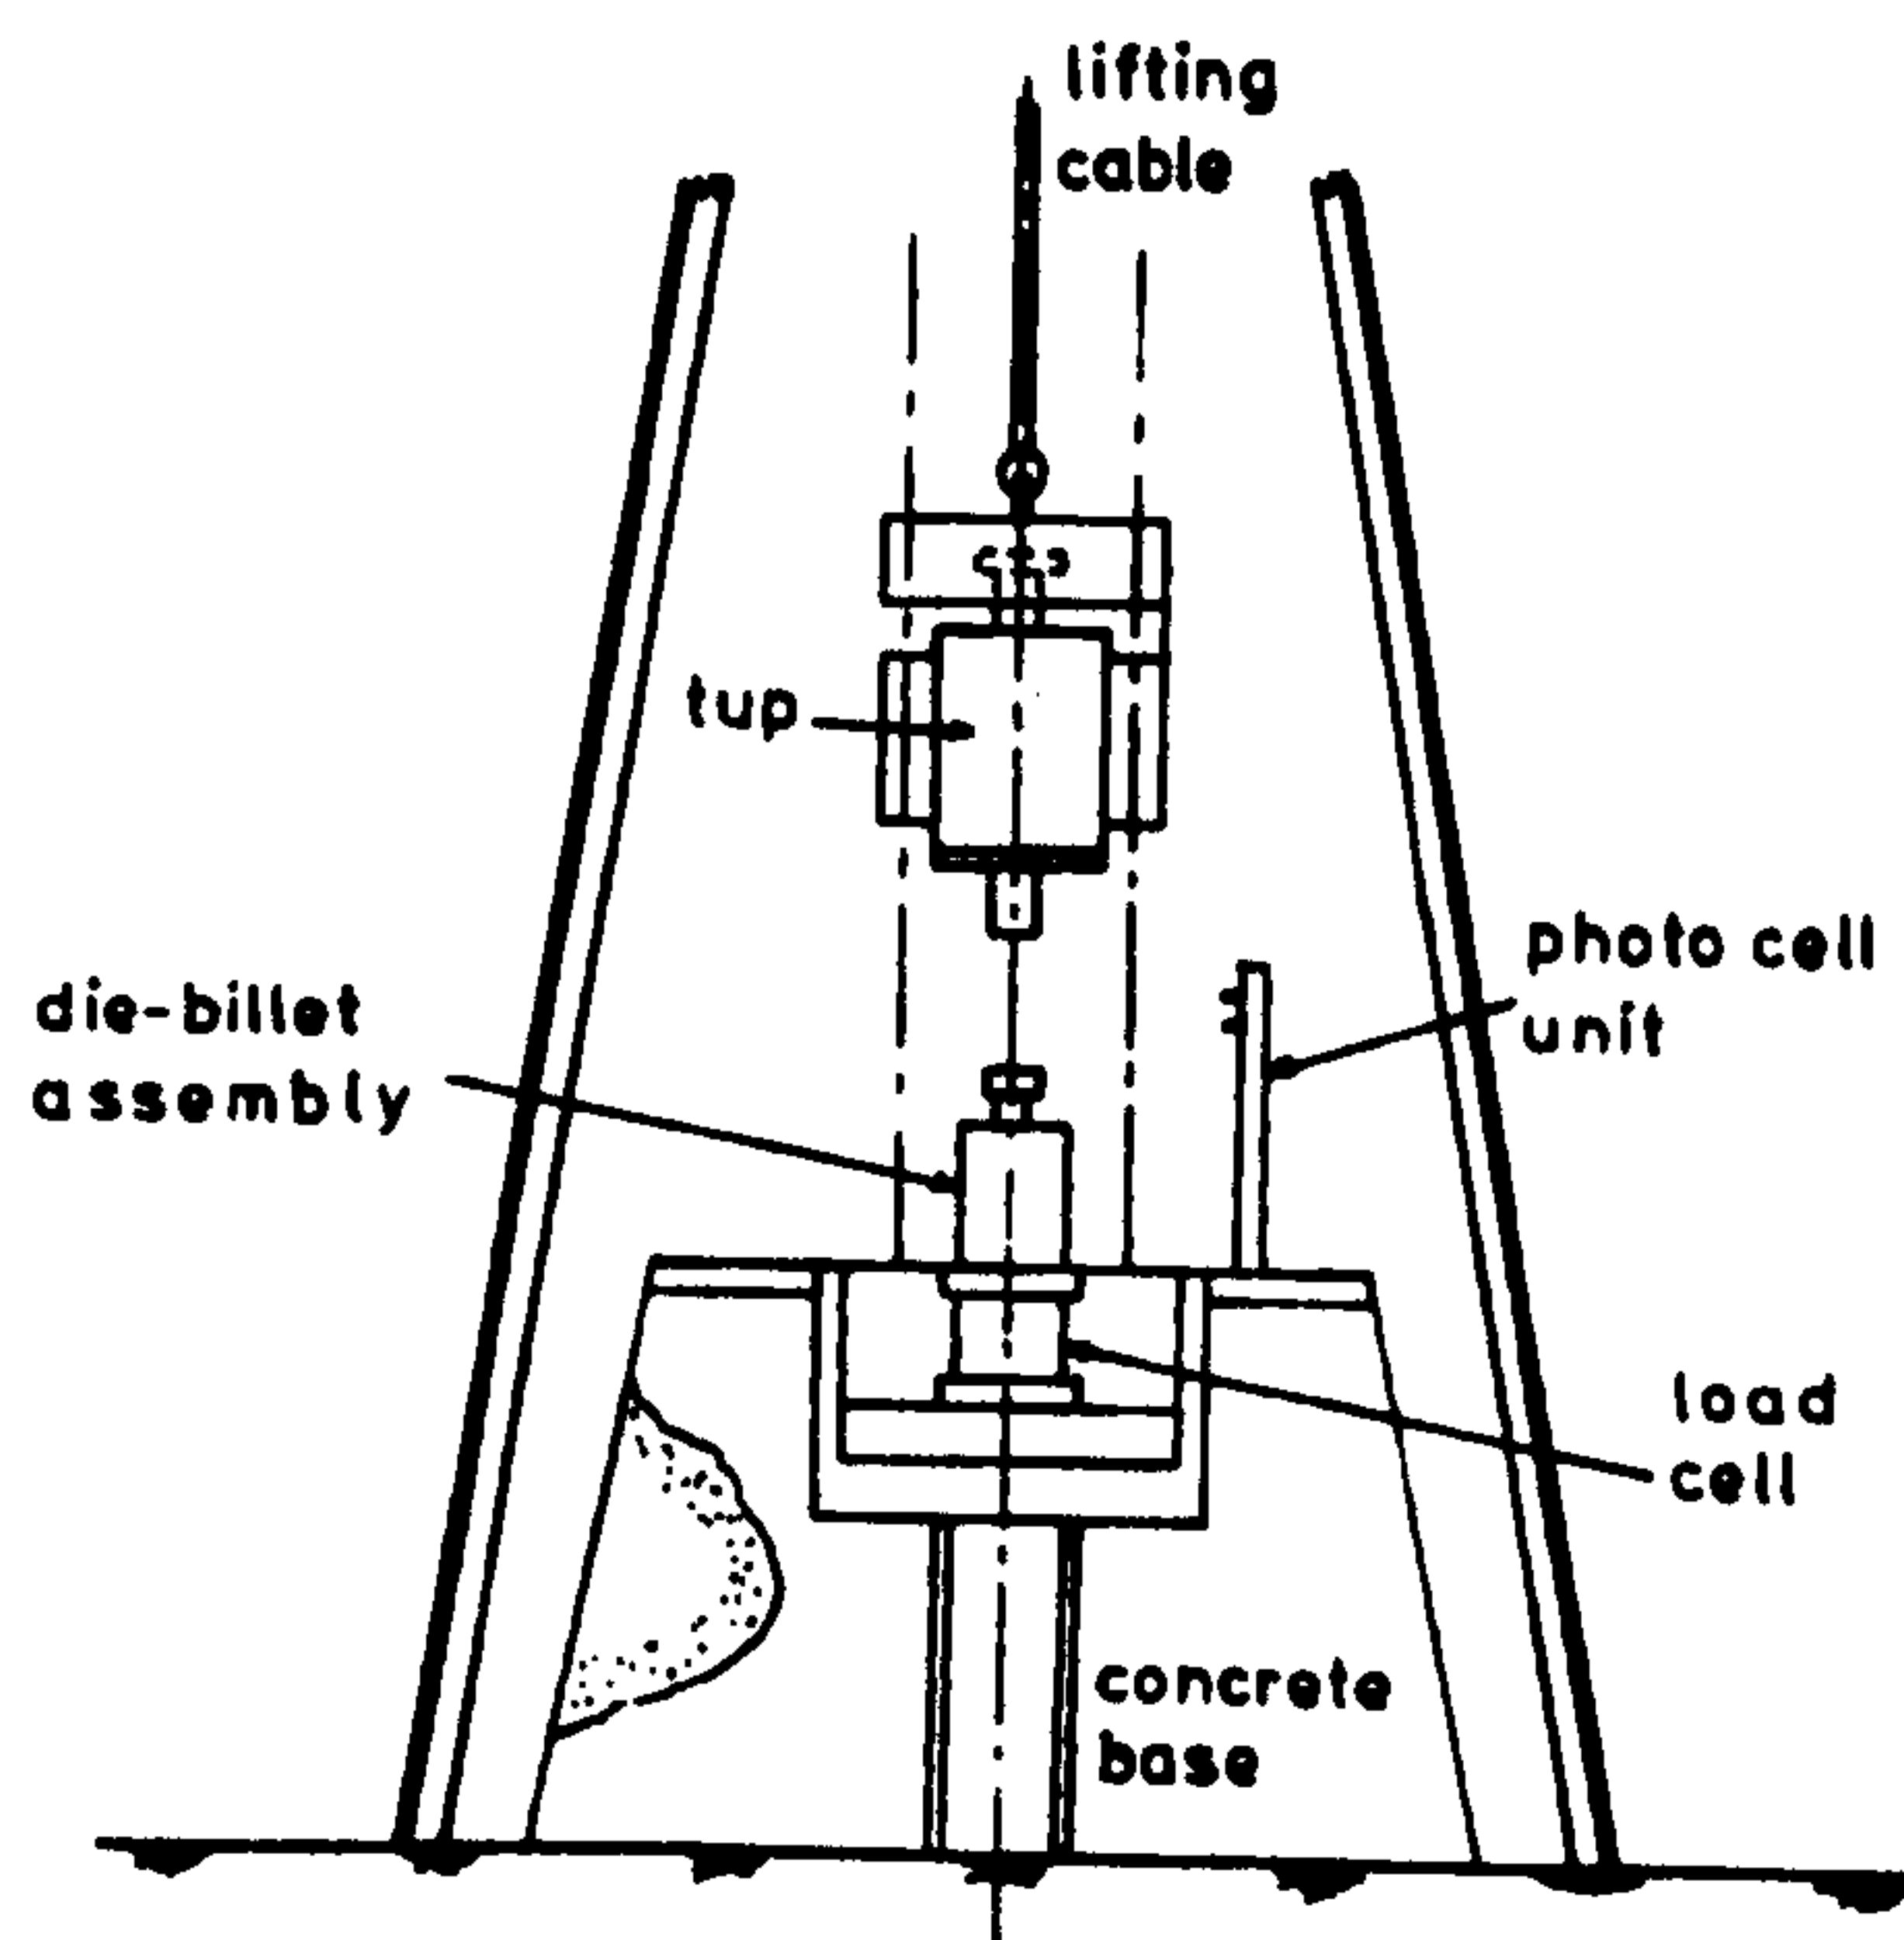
Schematic diagram showing the loading arrangement under the drop hammer.
